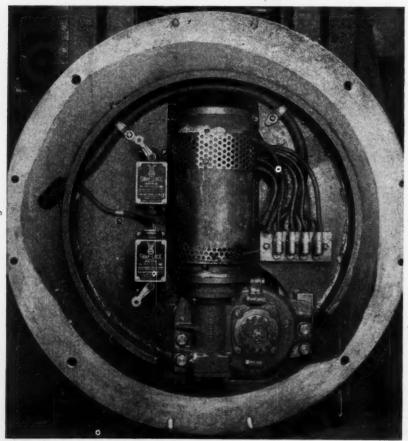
Above—Assembly of electric motor and worm-gear auxiliary reduction unit inside the elevator frame
